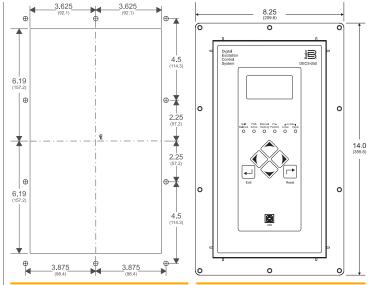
Cutout Drawing for DECS-250 and DECS-200 Panel Mount
